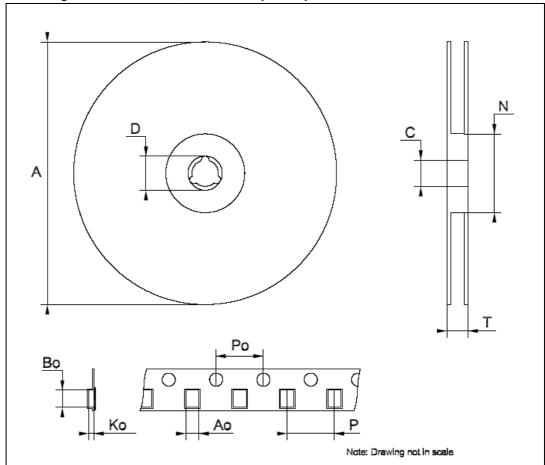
TSSOP24, TSSOP24 exposed pad and SO-24 reel dimensions
